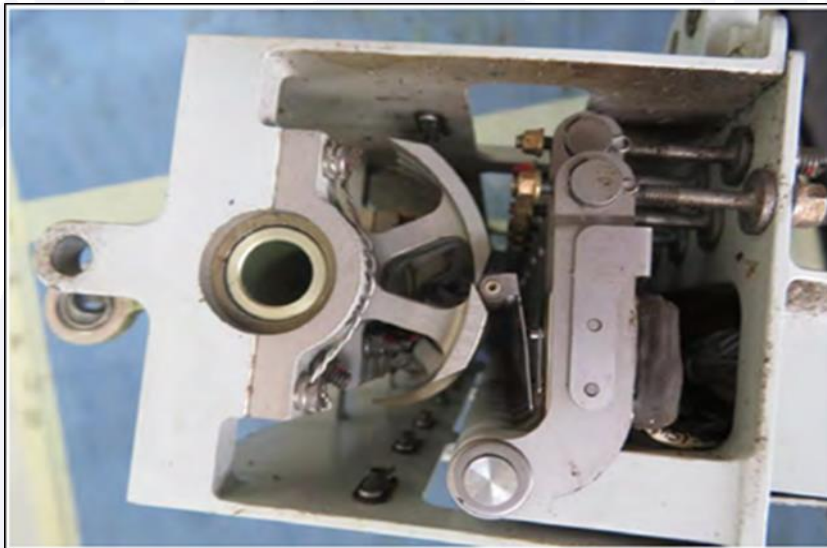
Right lateral view of the Microswitch Box disassembly.
